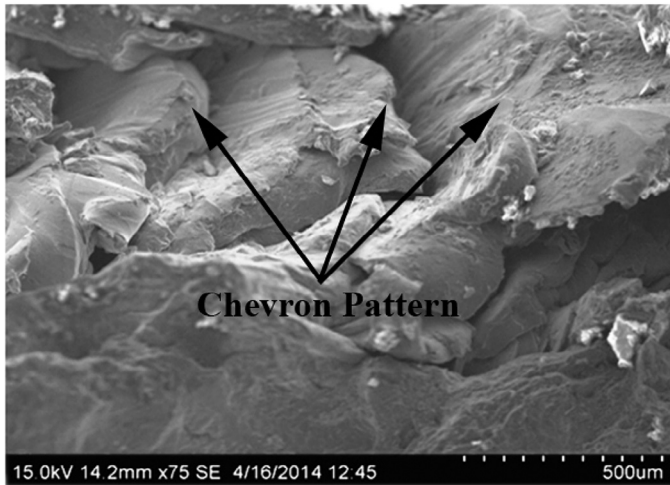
Fracture surface of Mg-Ti friction weld.
